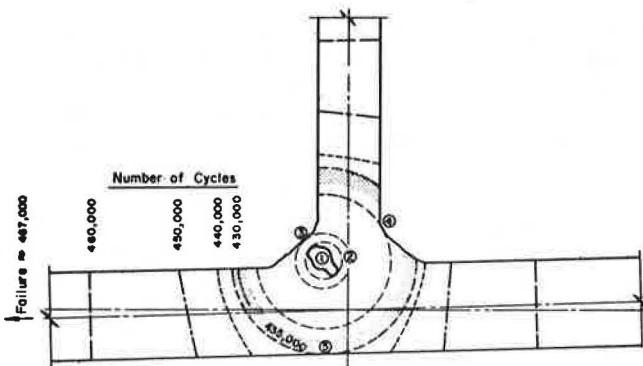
Stages of crack growth from a pore in the fillet weld.
